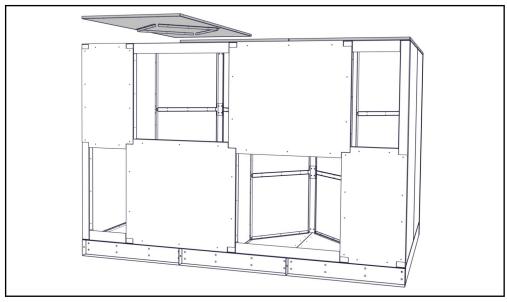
INSTALL ROOF ASSEMBLIES
